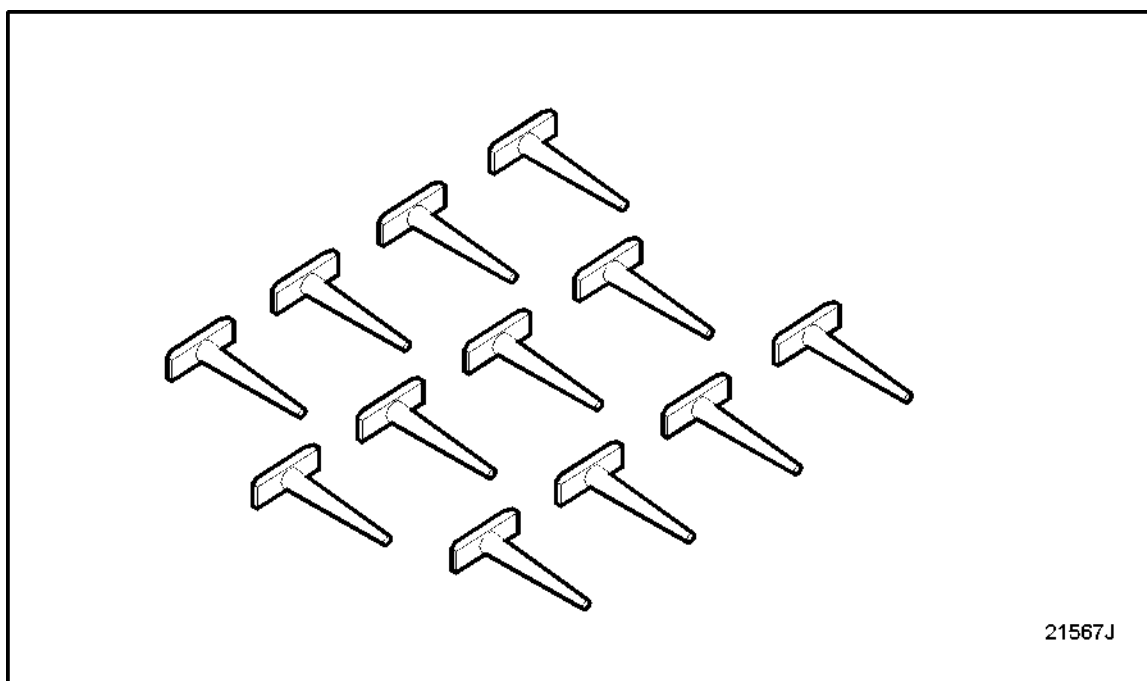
Terminal Remover (Deutsch),J 34513
